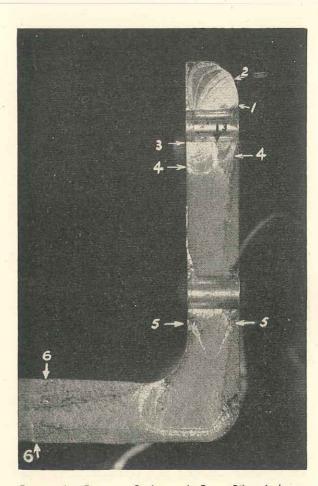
Fracture Surface of Rear Rib of Lower Channel Member, showing extent of fatigue cracking. Numbered arrows refer to mechanism of crack development described in text of report.
